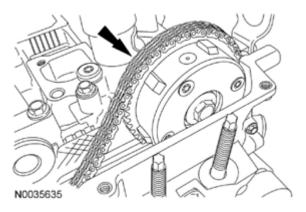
Locating Timing Chain On Intake Camshaft Drive Gear Courtesy of FORD MOTOR CO.
